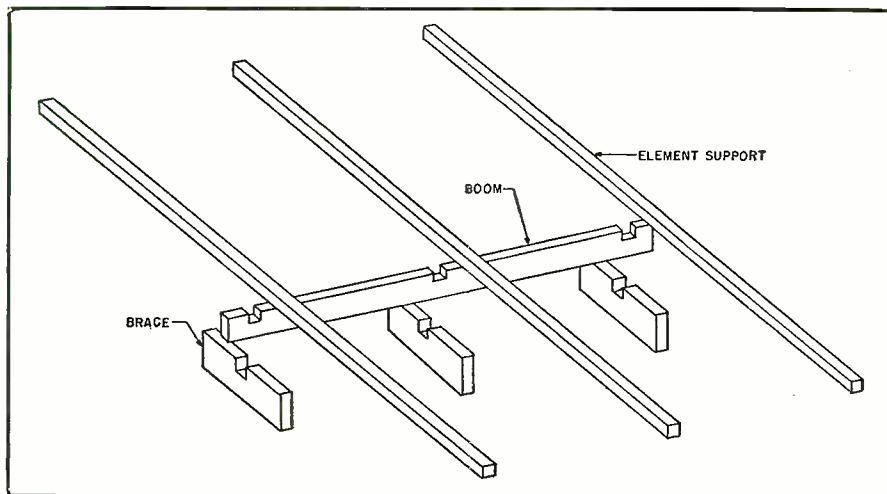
"Exploded" view of the antenna frame showing how parts are assembled.
